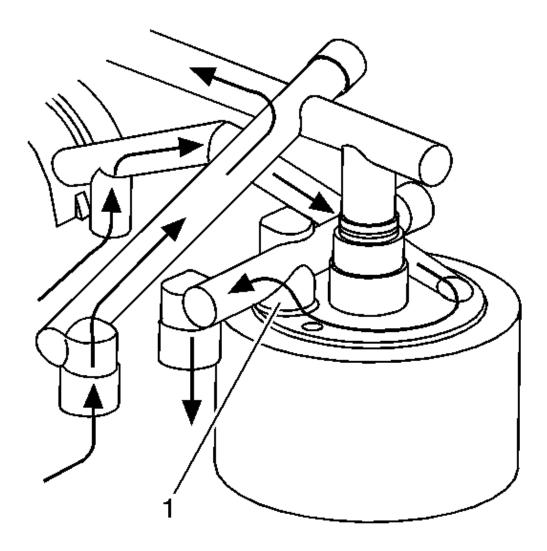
View Of Oil Flow (With Oil Filter Plugged) Courtesy of GENERAL MOTORS CORP.
